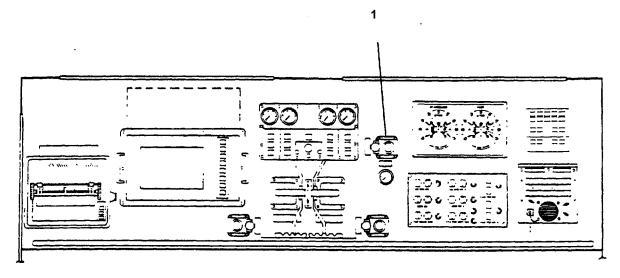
Bow Thruster Valve Locations (Sheet 1 of 2).
